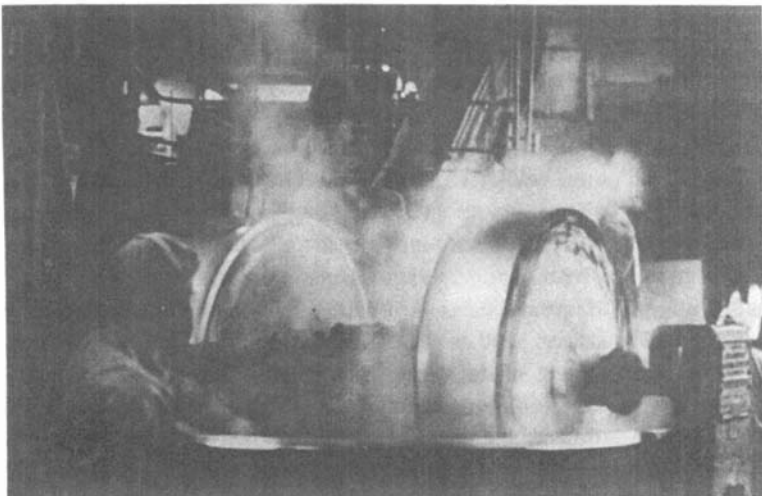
A muller for mixing mold and core sands. This unit is normally provided with an enclosing hood for dust control.
